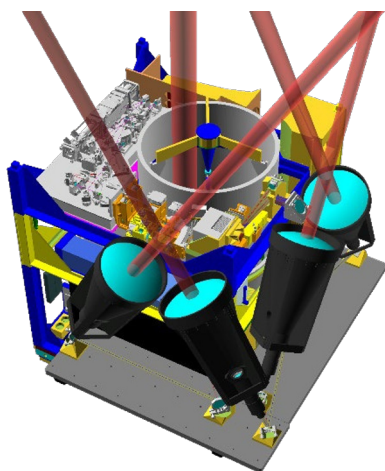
CAD drawing of the multi field of view upgrade mounted to the core unit.
